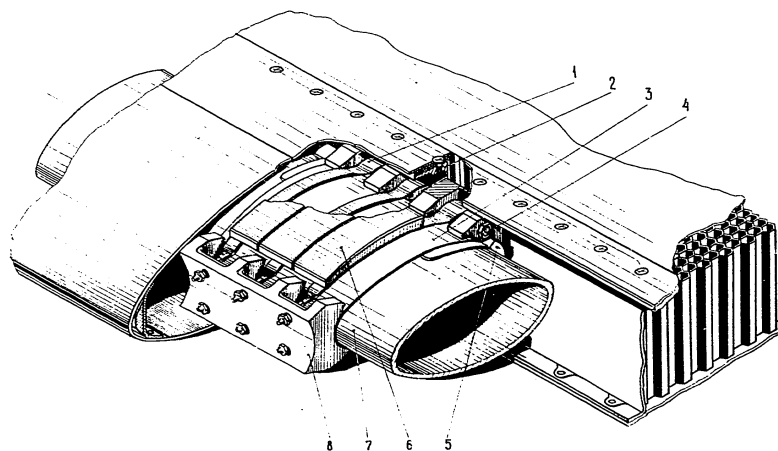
BLADE SECTION TRAILING EDGE-TO-SPAR ATTACHMENT
